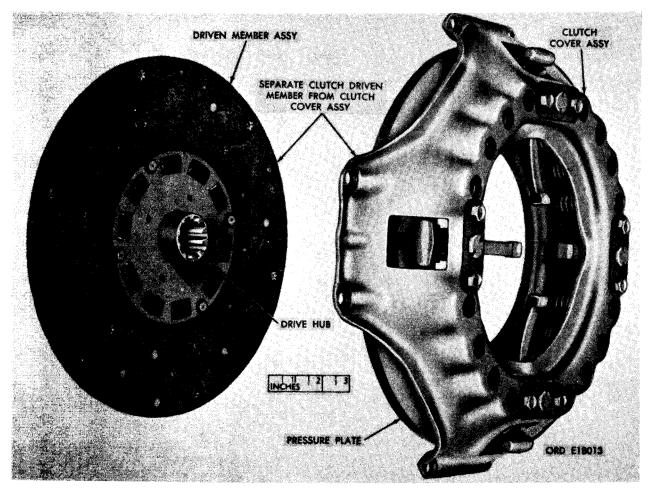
CLUTCH ASSEMBLY - PARTIAL EXPLODED VIEW.
